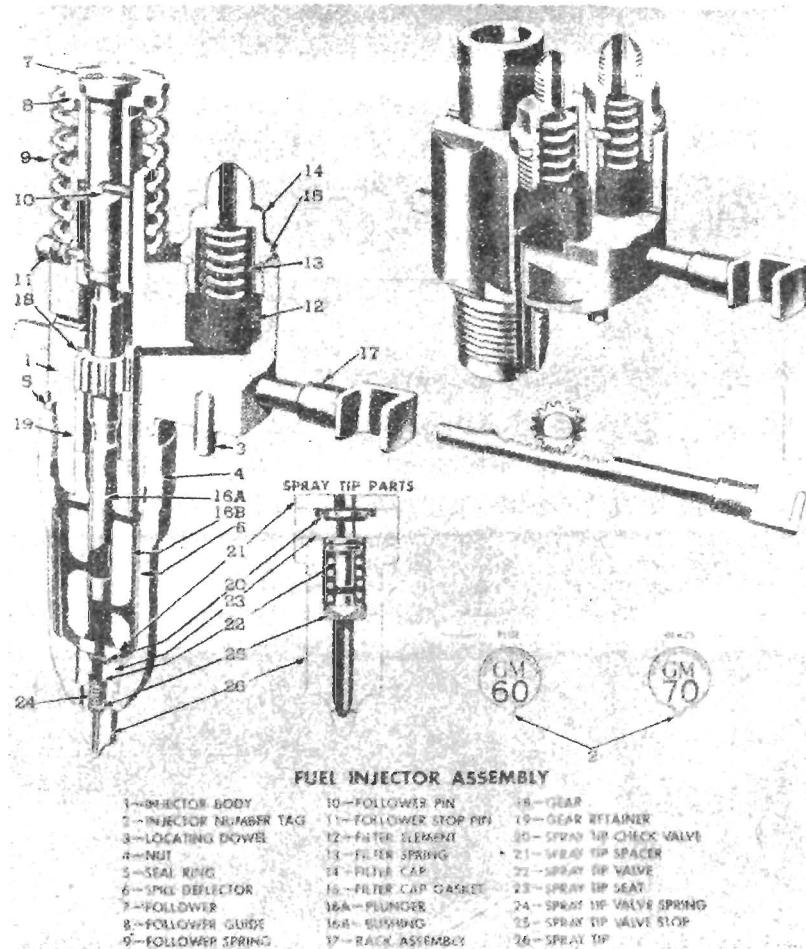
Typical Unit Injector (courtesy of Detroit Diesel Engine Division, General Motors Corporation).
